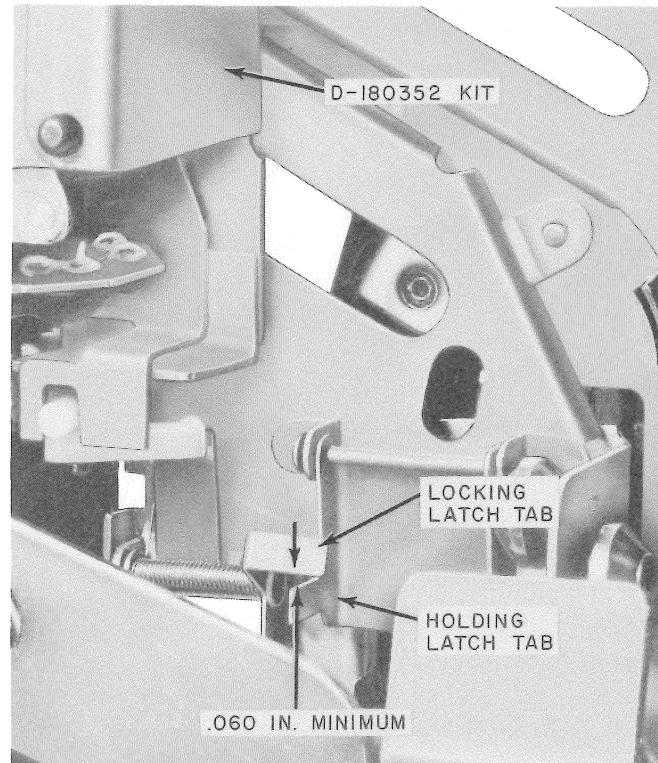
Clearance Between Locking Latch Tab and Holding Latch Tab
